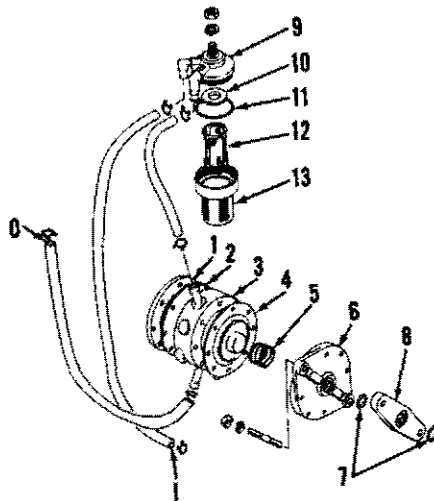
Exploded view of diaphragm type fuel pump and fuel filter assemblies.
